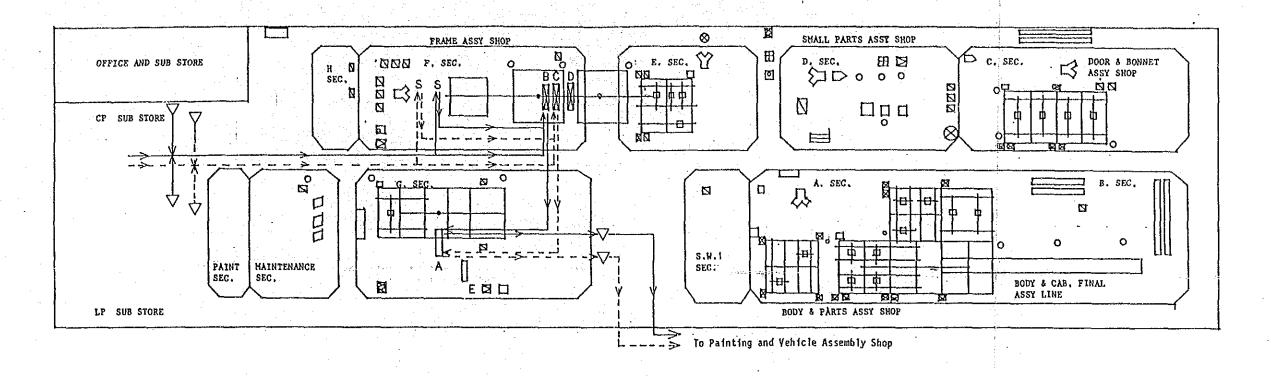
NO.4 HEAVY INDUSTRY BODY ASSEMBLY SHOP EQUIPMENT LAYOUT
